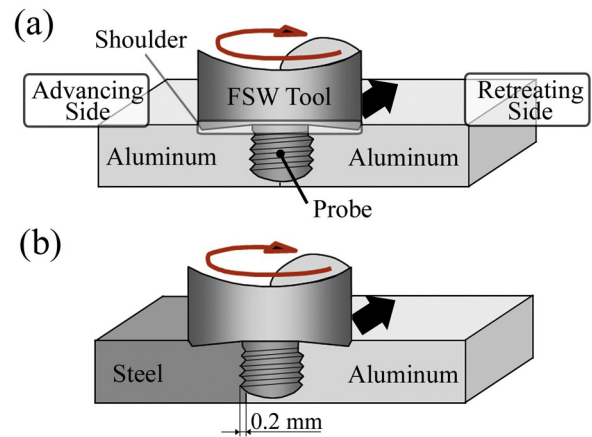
Schematic of friction-stir welding: (a) similar welding and (b) dissimilar welding.
